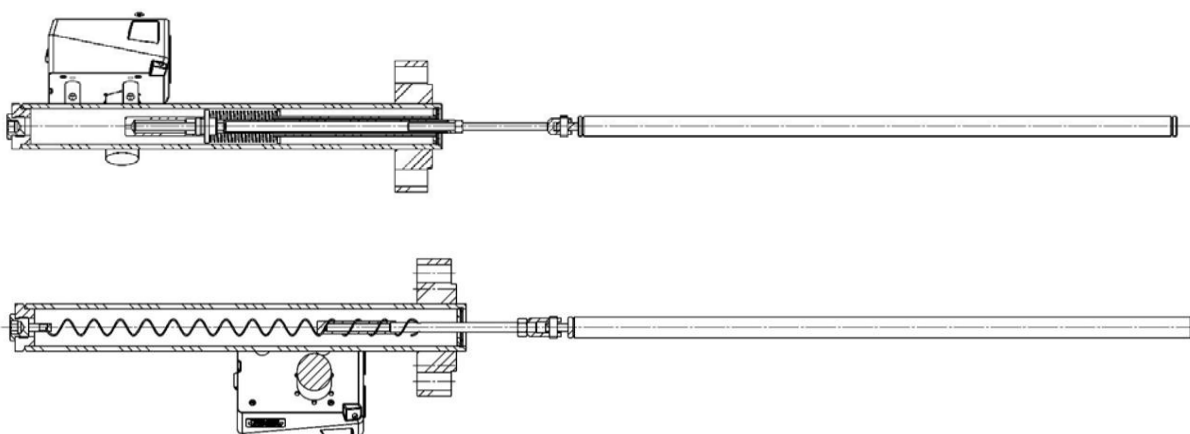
location of a float in a housing located outside the tank may be connected by flanges or welded
